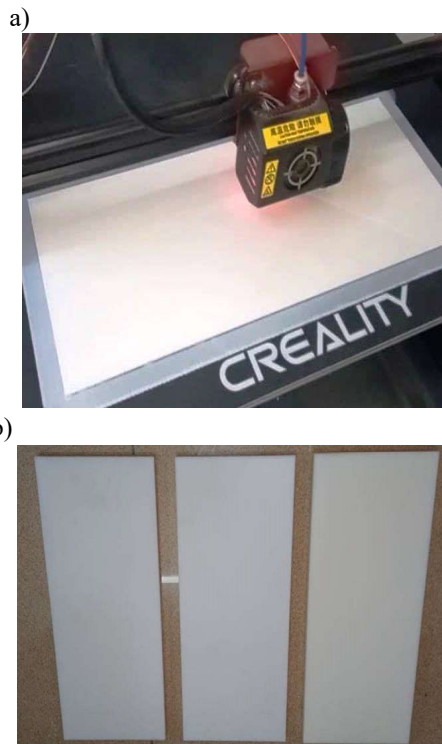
manufacturing FG specimens using 3D printing; a) 3D printing process, b) porous core production
